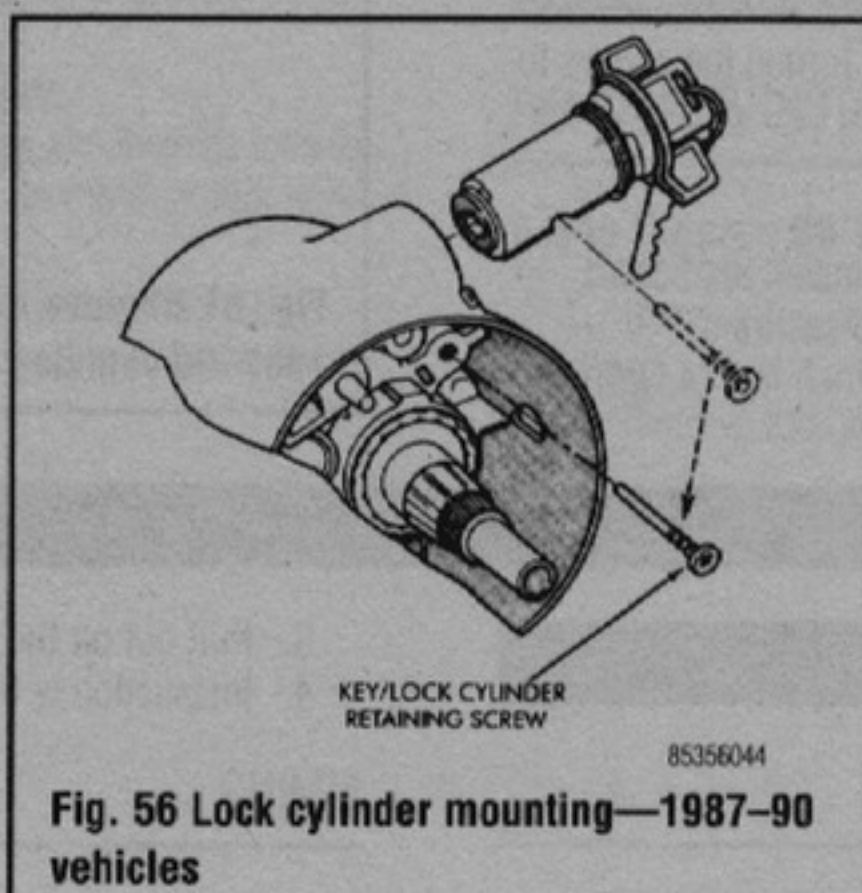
Lock cylinder mounting—1987-90 vehicles
